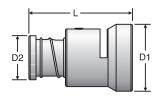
Captive O-Ring Assembly Tool dimensions
